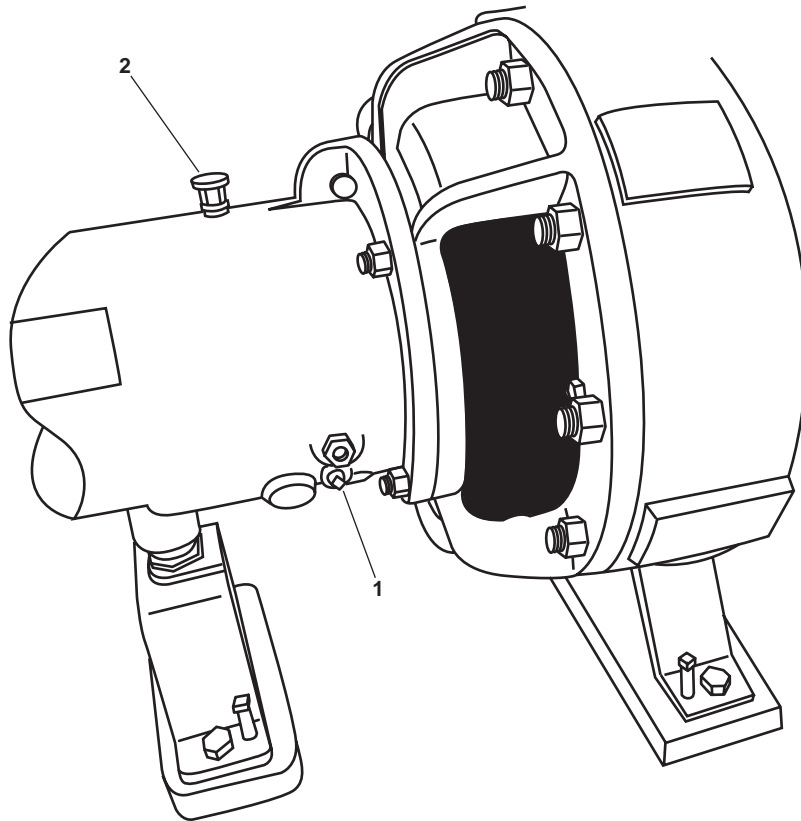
Diesel Engine-Driven Firefighting Pump – Drain/Vent Plugs
